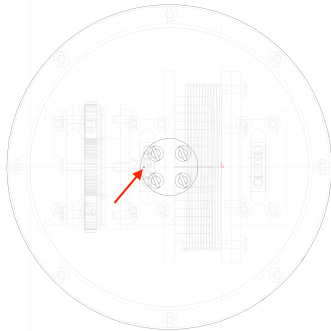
Top-view SolidWorks model of the buoy assembly showing the center of mass with the red arrow. The image is taken with 20 mm grid spacing.
